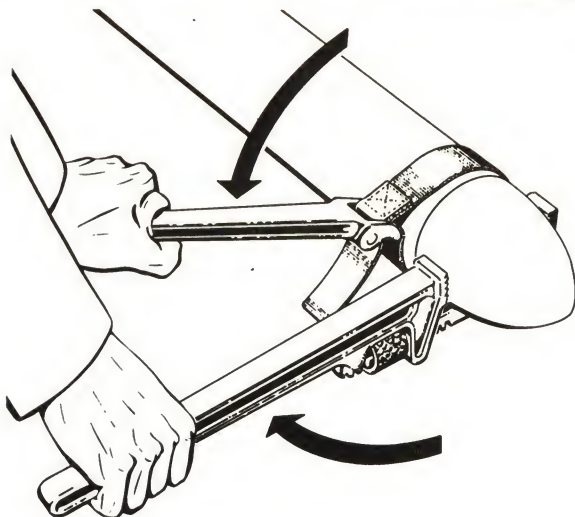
Assembling Head and Motor of 2.25-Inch SCAR Rocket.
